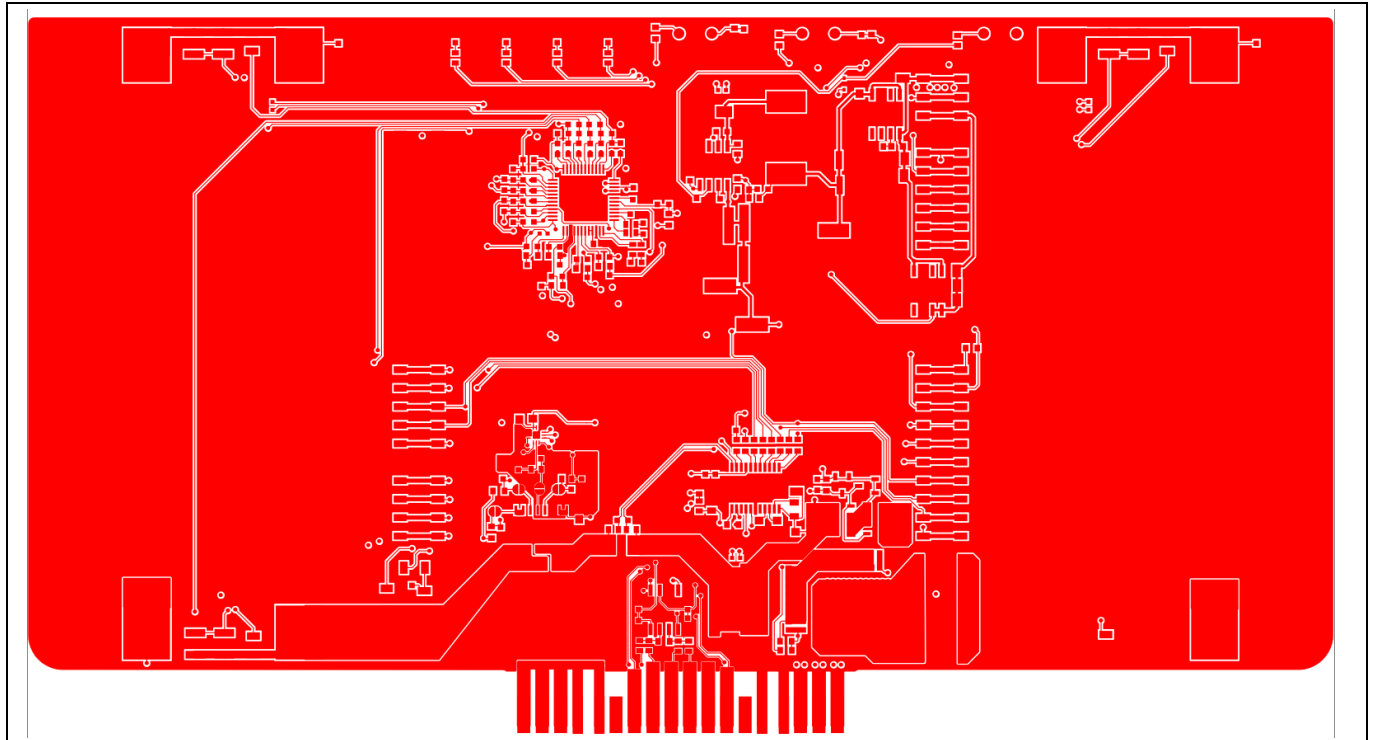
DEMO_IMR_BMSPWR_V1 PCB top layer
